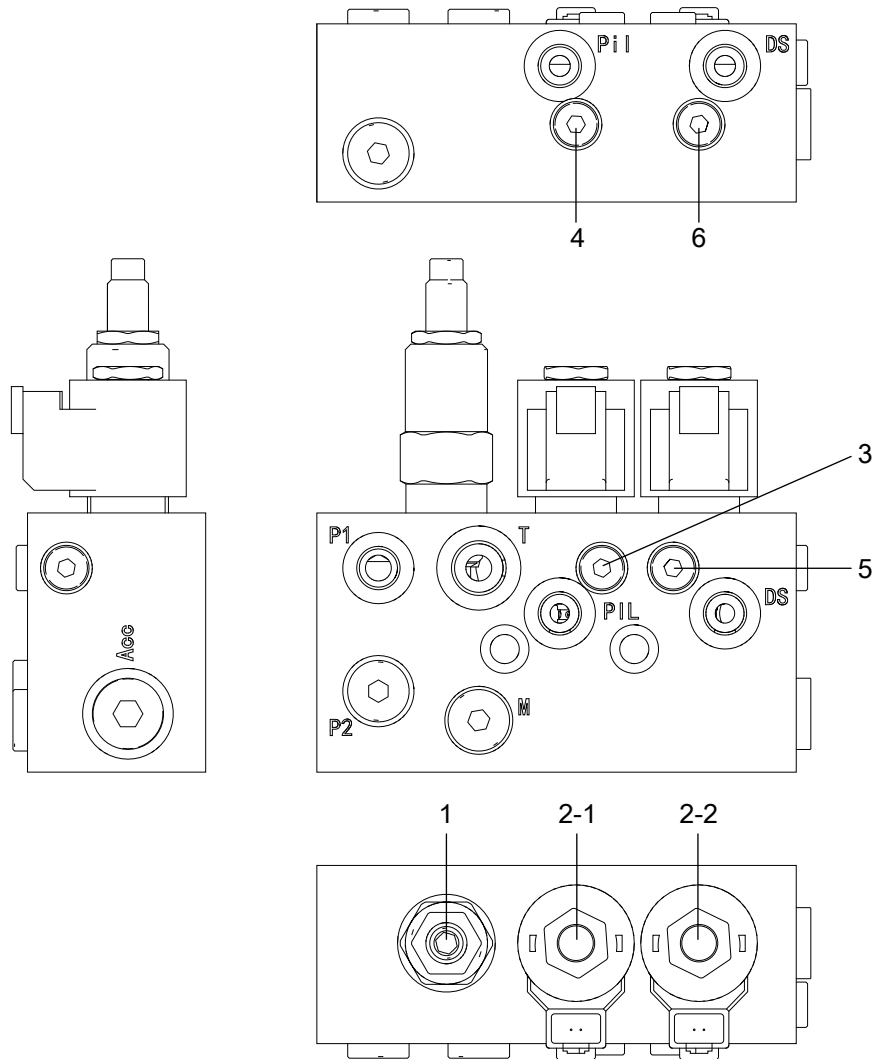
Brake & Two-speed Control Valve Manifold (PN.20204000006)
